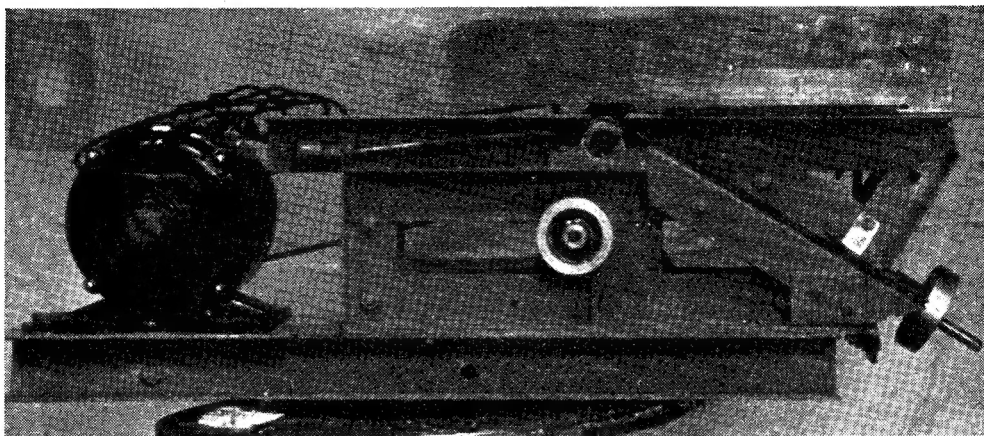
Photo A. Showing working side of machine for operator. Chromed index finger shown near bottom of slide
